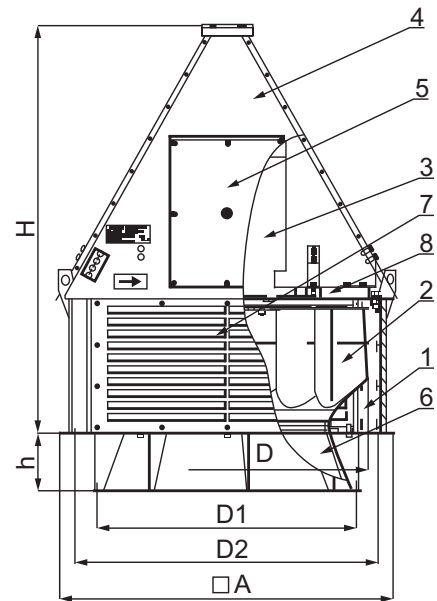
Layout, Overall and Connection Dimensions [mm]
